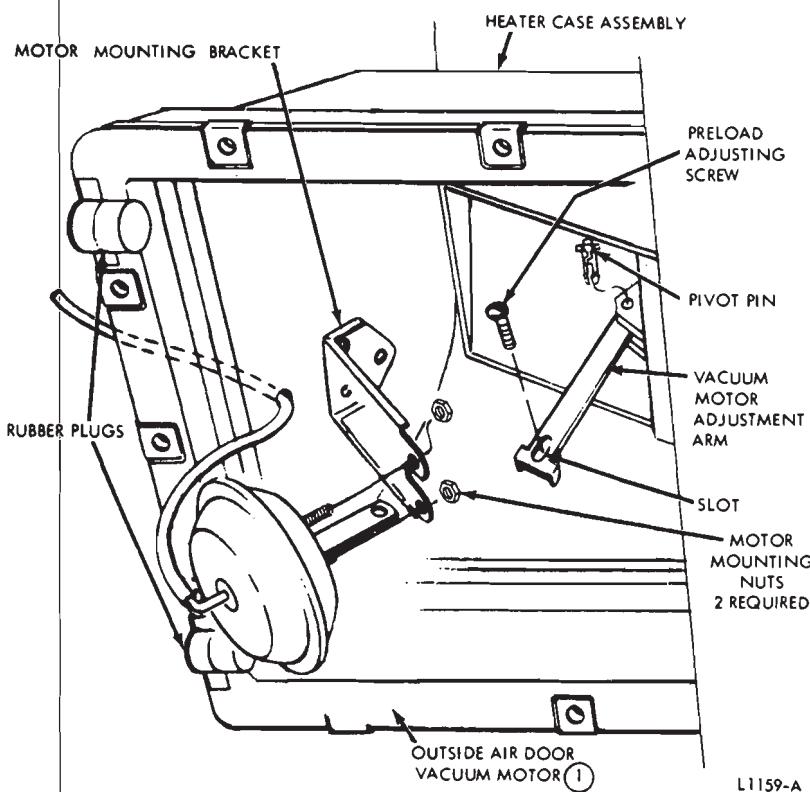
Standard Heater Outside Air Door Assembly—Lincoln Continental
